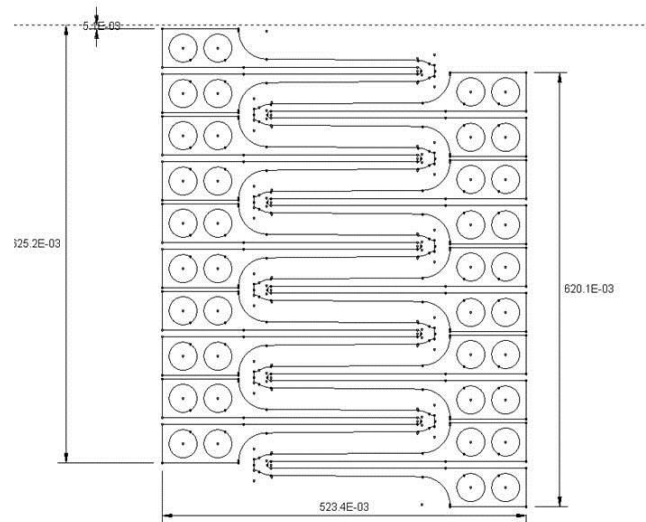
Fatigue coupons, laid out and nested in 2 dimensions – the vertical dimension on the left is the circumference of the tubing (in inches).
